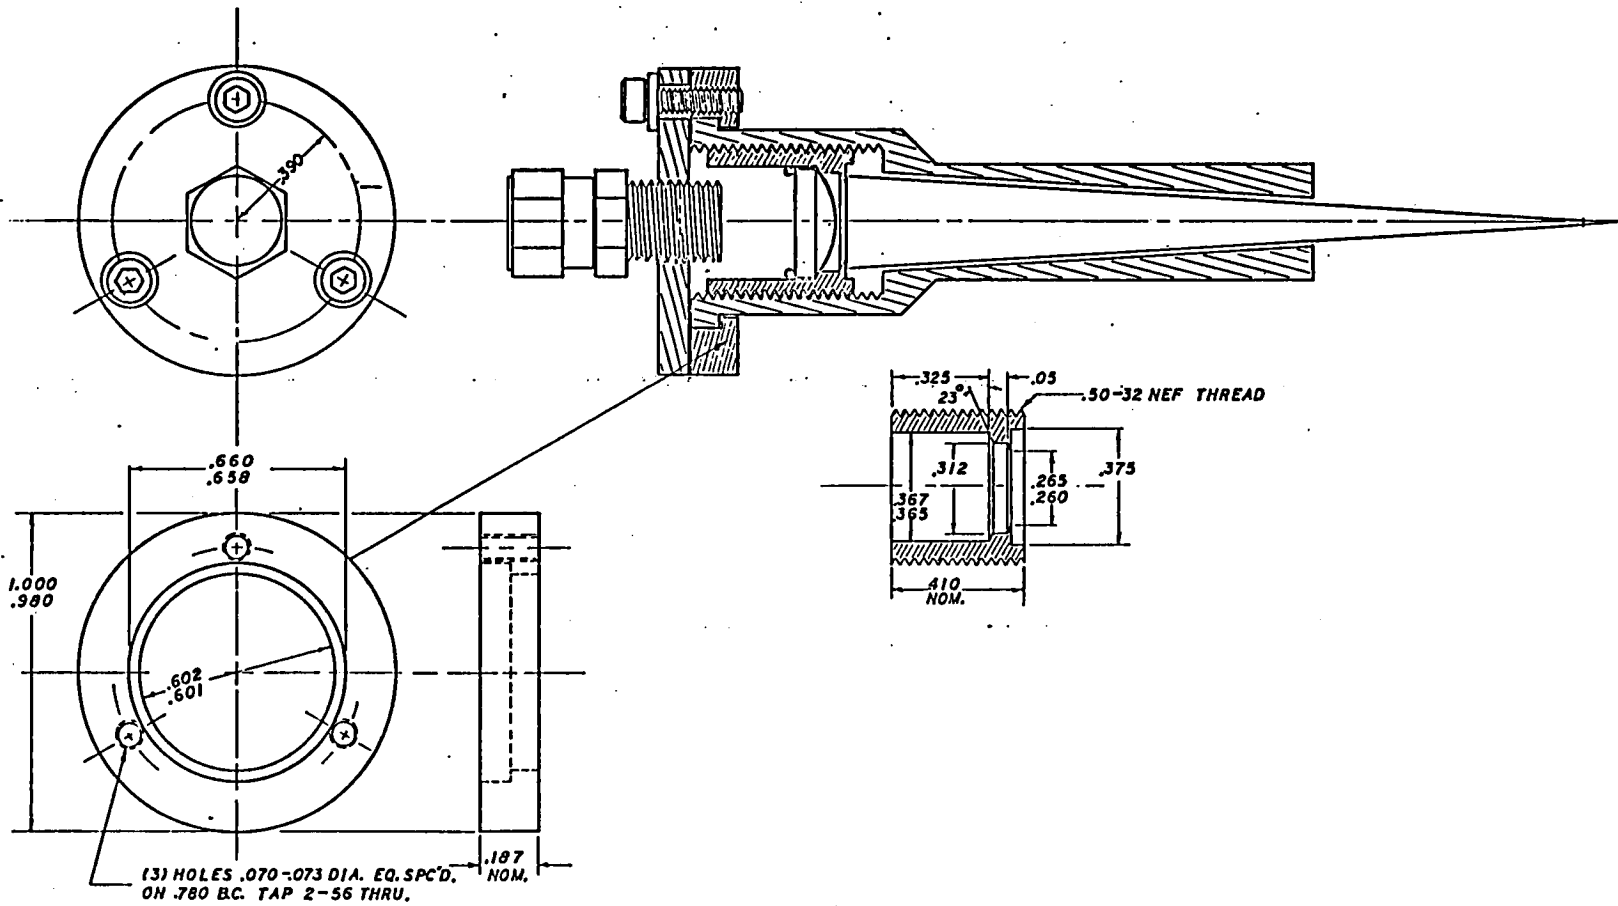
Optical Gas Temperature Sensor and Holder Assembly.
